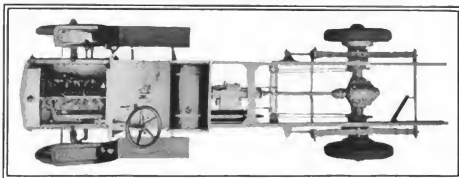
Plan view of Standard 2-ton chassis. Note gearset location
